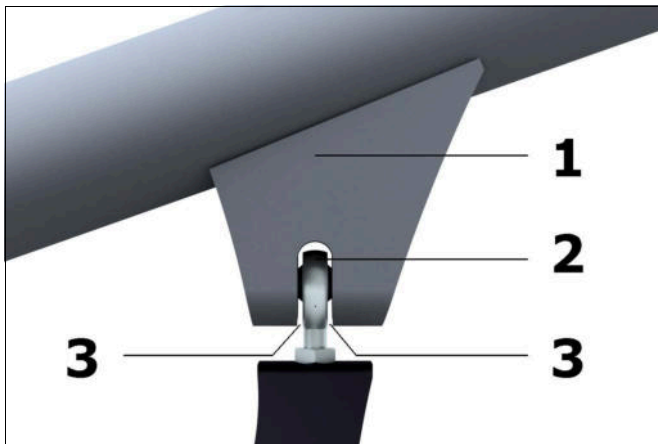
The rod end (2) must not touch the rod end bracket (1)
